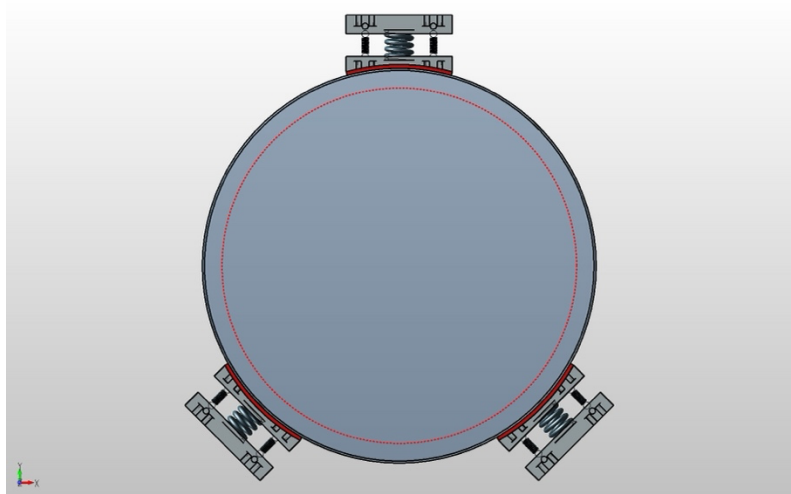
Image of the 330mm transmission flat being supported by three engagement pads in free space. Note that the surface engagement pads are supporting the weight with both the assistance of the rubber engagement pads as well as compression springs ($K = 415\text{lbs/inch}$).
